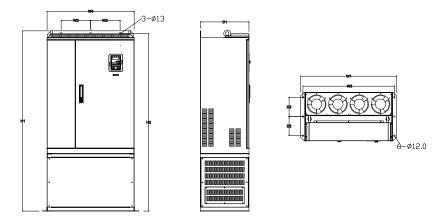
Floor installation of 660 V 250-350 kW VFDs
